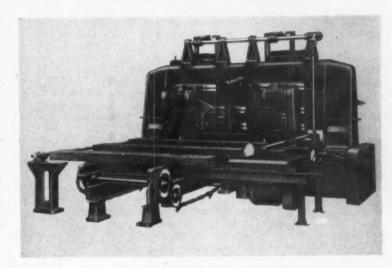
A View of the In-feed End of the Robinson Fully-automated Adzing and Boring Machine, Showing the Adzing Heads with the Marker Saw Between, and the Trimming Saw in the Foreground
